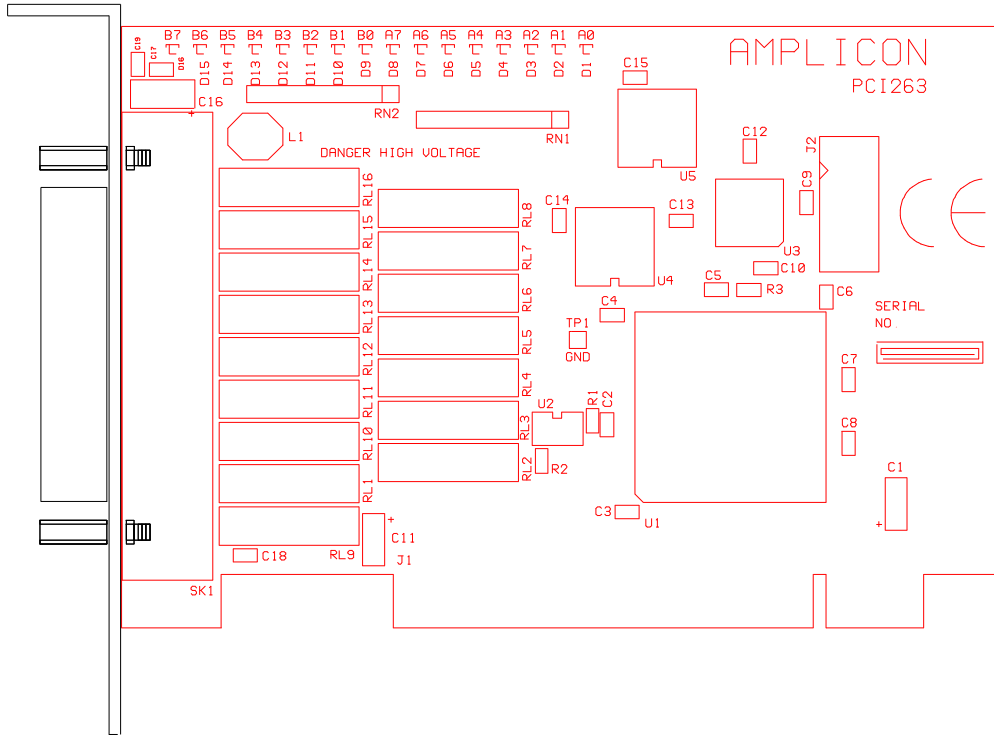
PRINTED CIRCUIT LAYOUT
